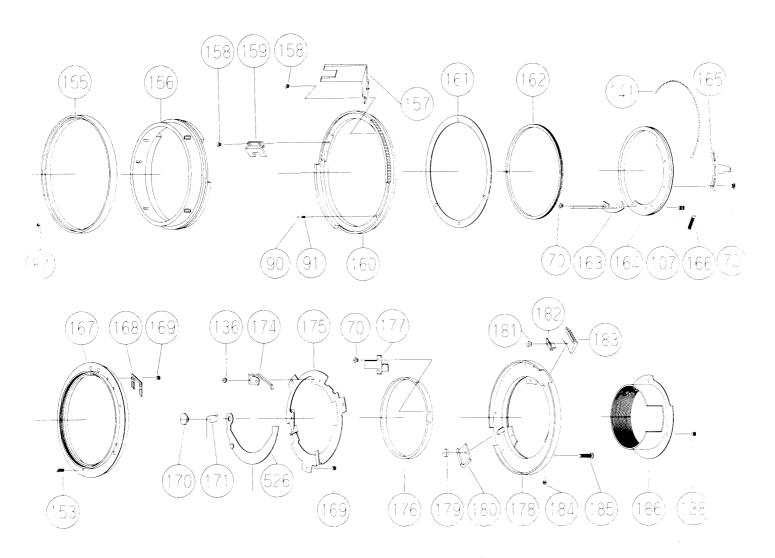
Olympus Mount Assembly (Ref. 525)
